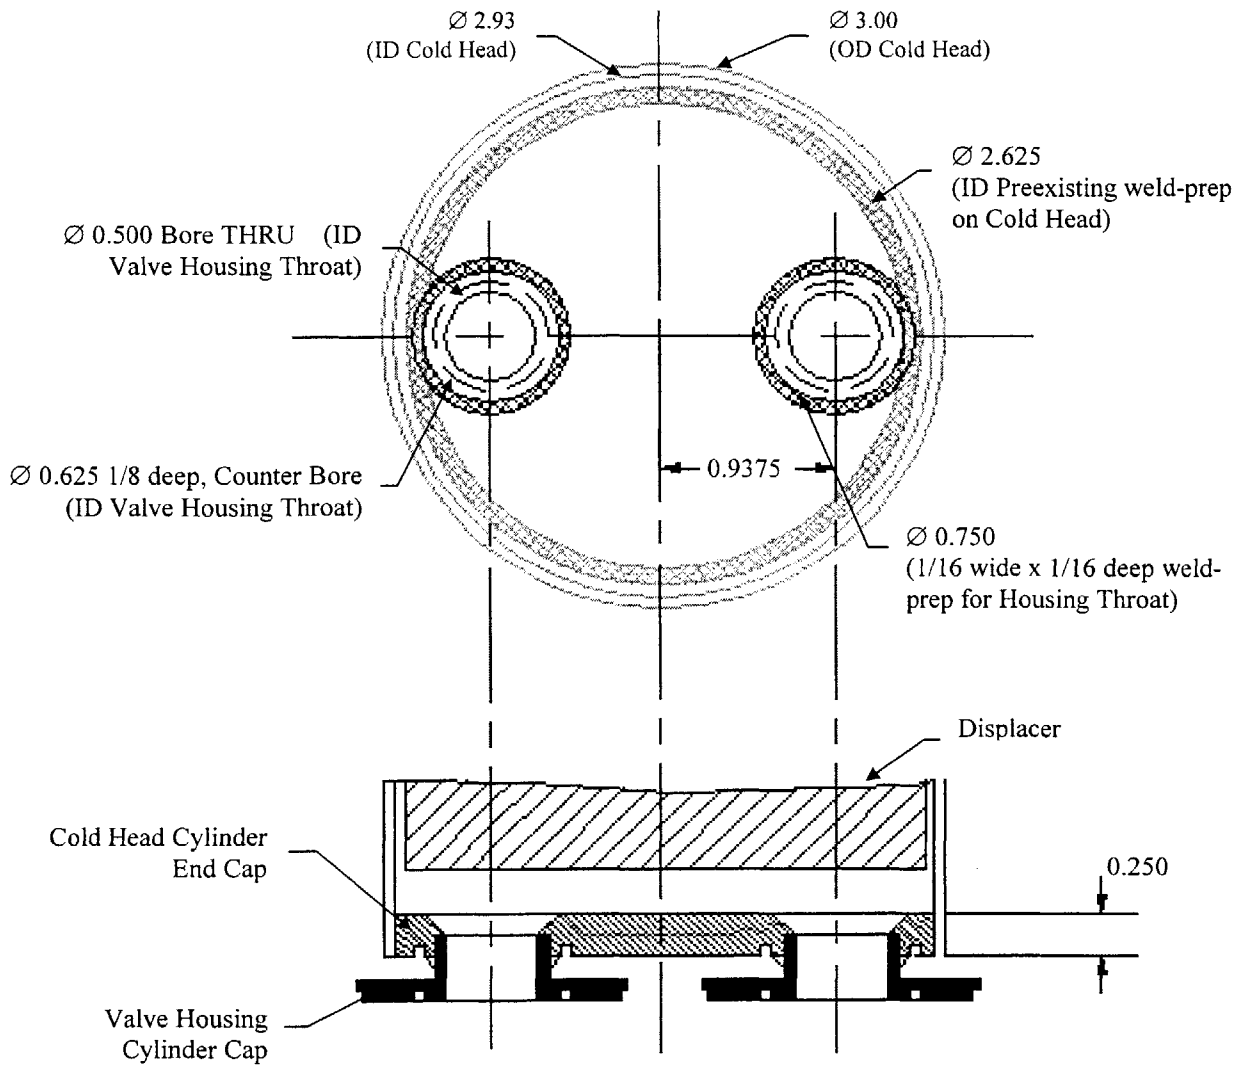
Dimensions of the Cold Head relative to the Valve Throat and Cylinder Cap.
